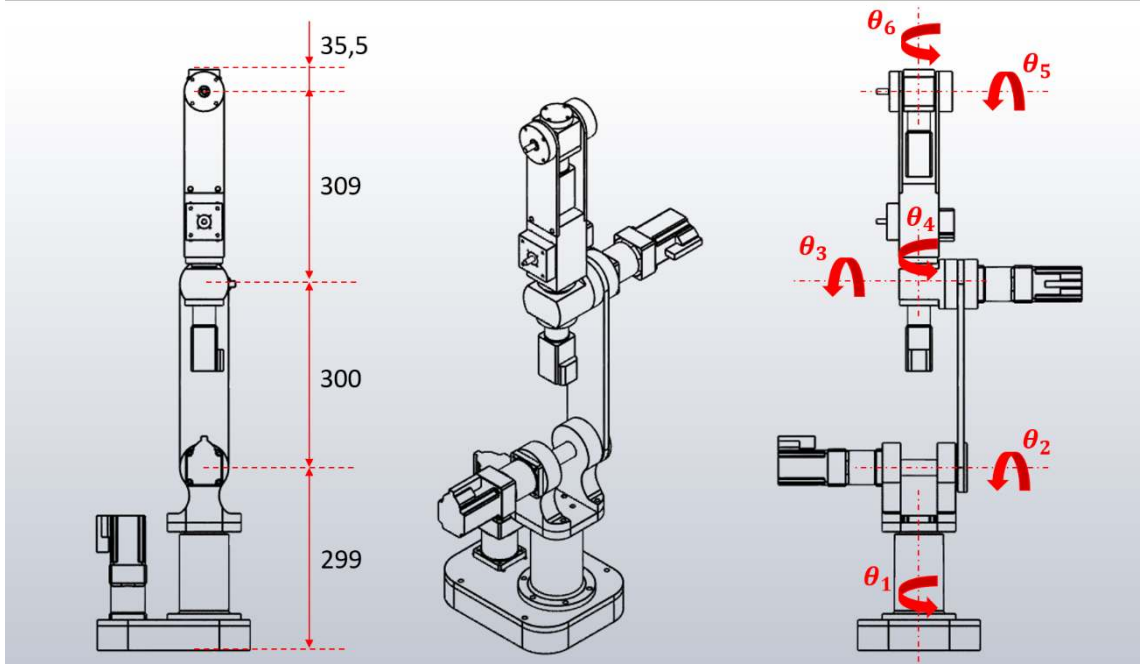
Technical Drawing of the Designed Robotic Arm
